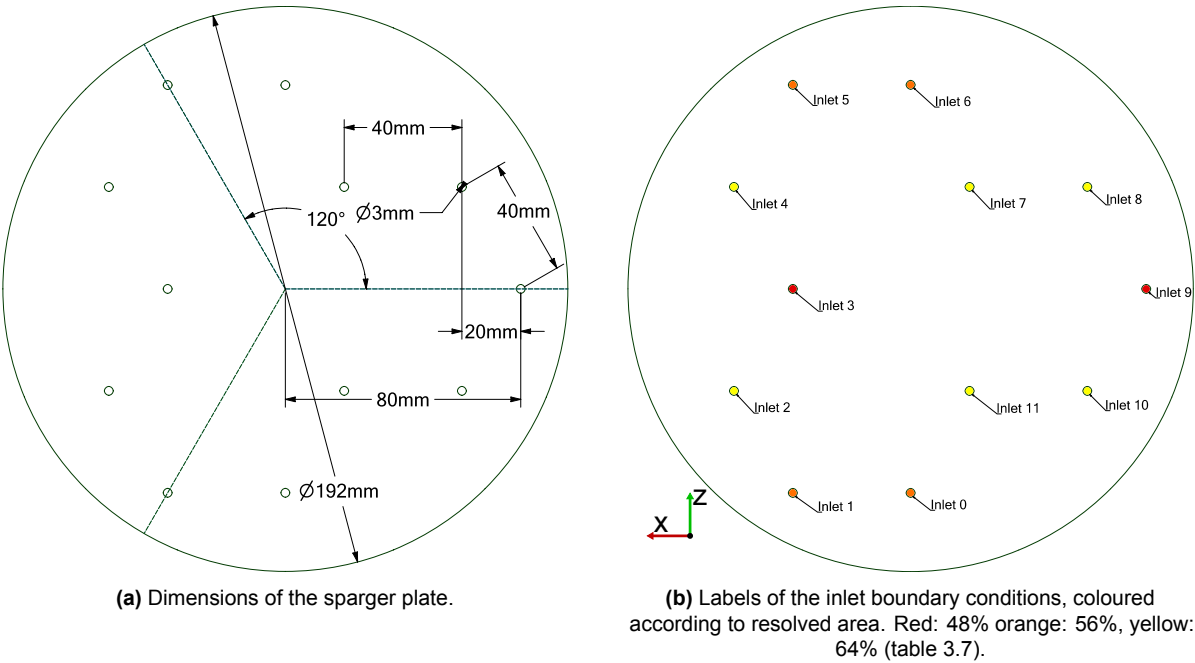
The full-scale Volger column perforated sparger plate: dimensions and inlet labels.
